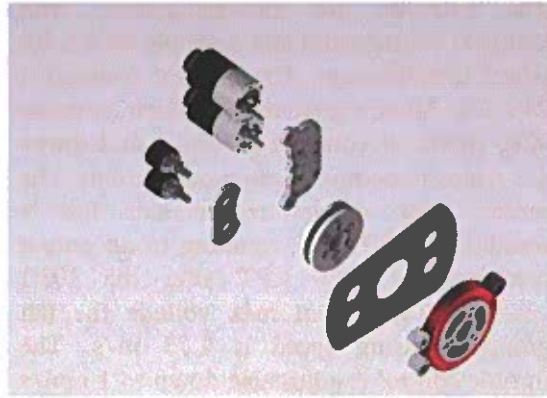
EXPLODED VIEW OF THE UNIVERSAL ARM DRIVE UNIT
